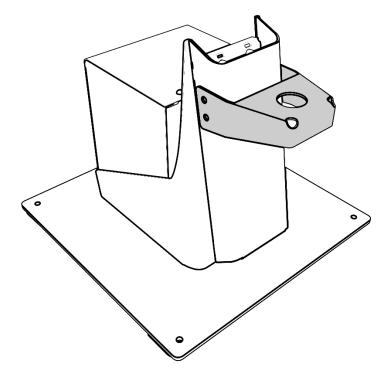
Installing the mounting bracket on the Self-Service Countertop Kiosk. Shown with optional Enclosure for Scanner and Printer.
